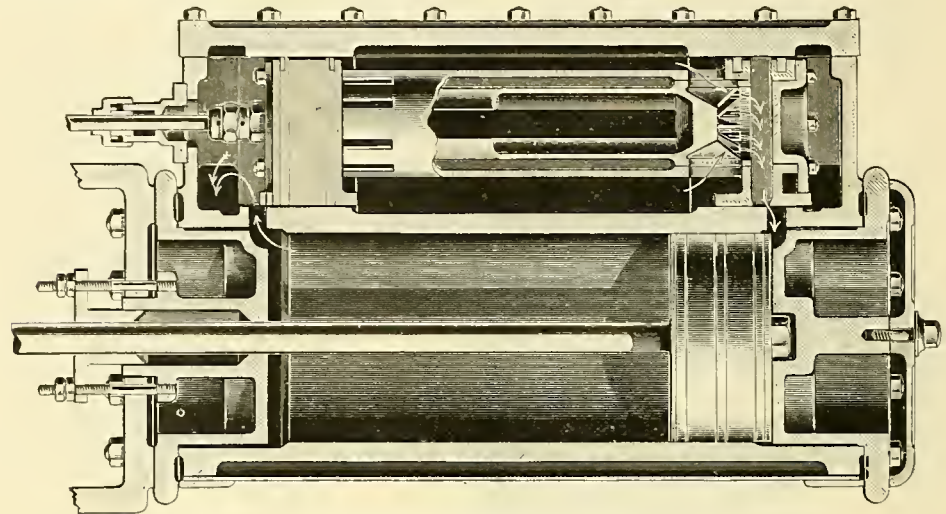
SECTION THROUGH CYLINDER OF AMERICAN ENGINE.
